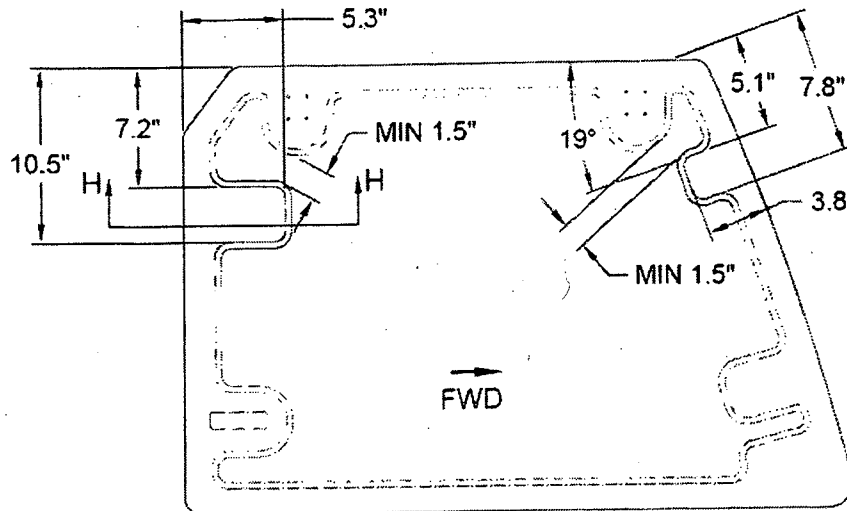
(a) – D3186-1 SPACEPOD™ DOOR COMPOSITE MODIFICATION
